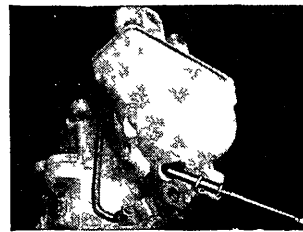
Install nozzle, nozzle retainer plug and nozzle passage plug and new gaskets
